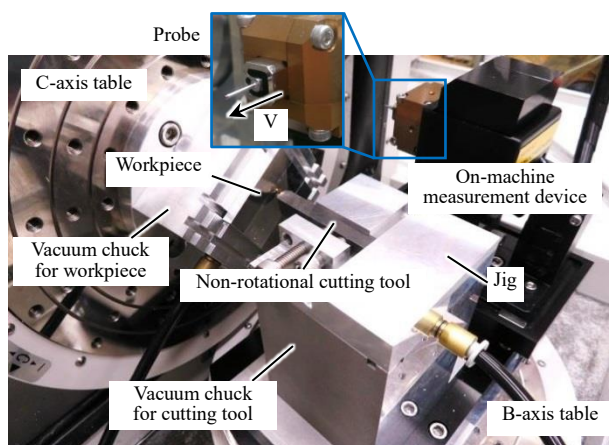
Tool and workpiece setting on ultraprecision machining center
